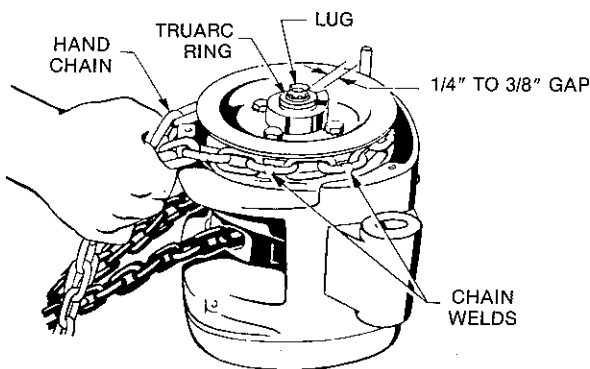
FIG. D, INSTALLING HAND CHAIN WHEEL
